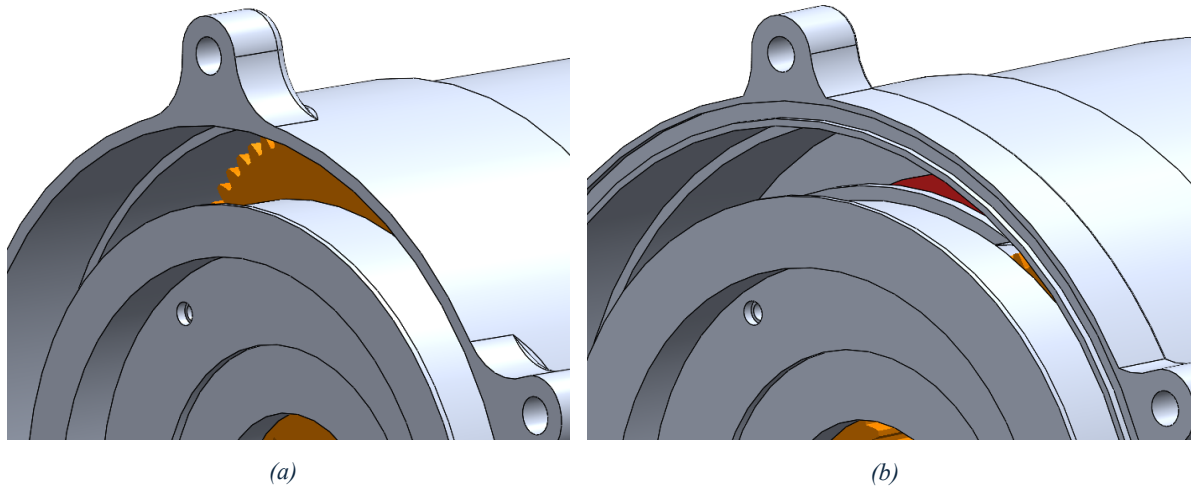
Motor Plate Sealing Face (a) No Groove (b) Grooved
